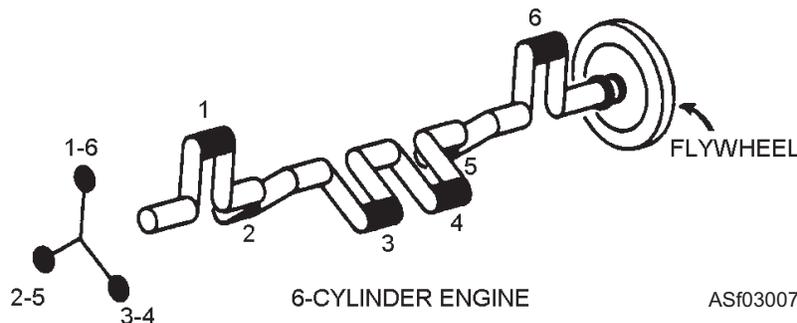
Crankshaft for a 6-cylinder engine.
